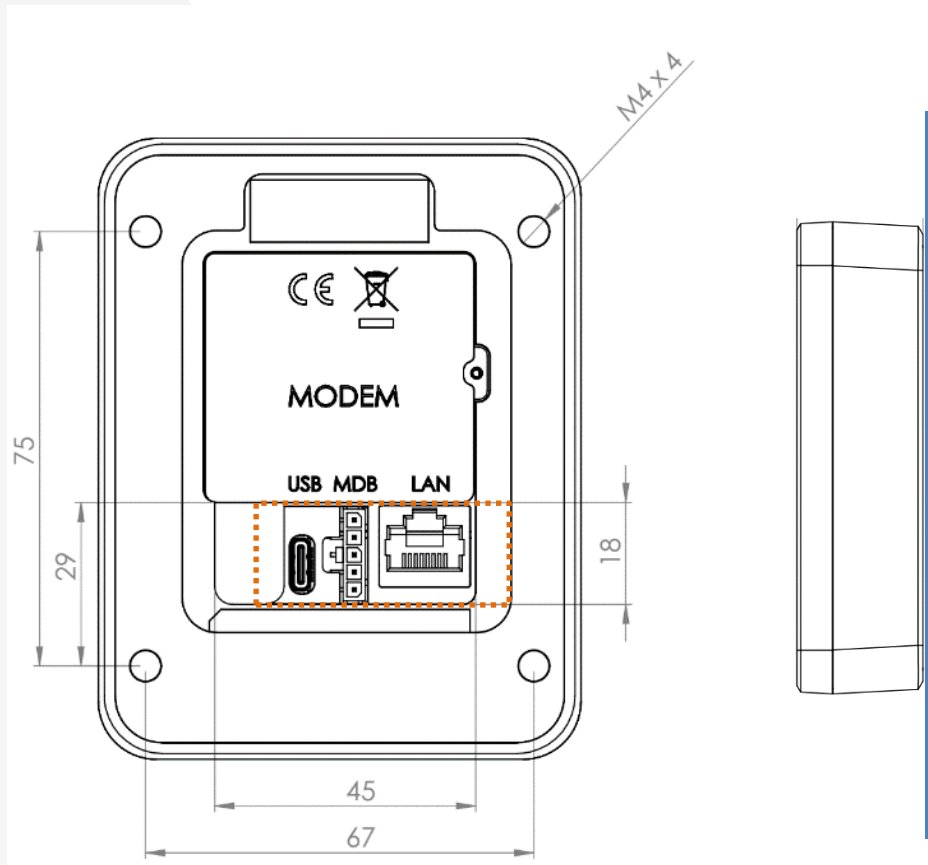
Mounting footprint with dimensions in millimeters (left) and side view (right)
